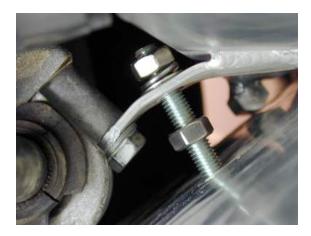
Intercooler Heatshield rear mounting (prior to tightening).
